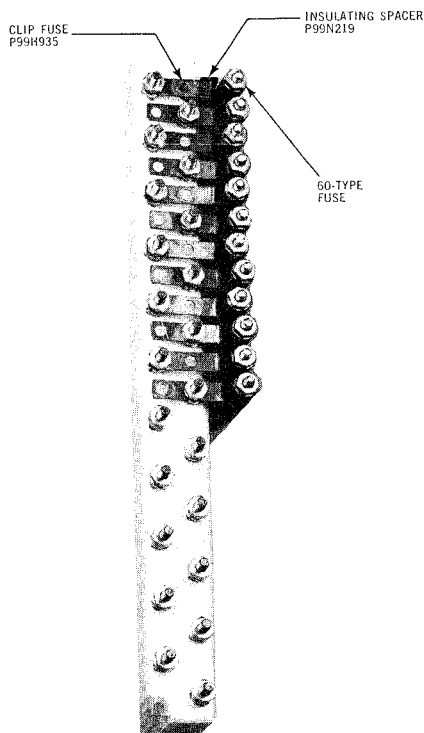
Connecting Block 5555 Equipped With 60-Type Fuses, Clip Fuse P99H935 and Insulating Spacer P99N219
